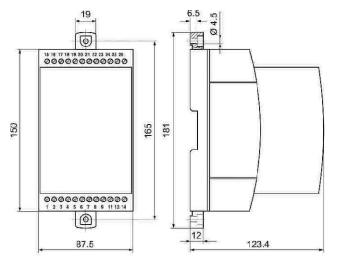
RISH DuceM40 in housing T24 screw hole mounting brackets pulled out.
